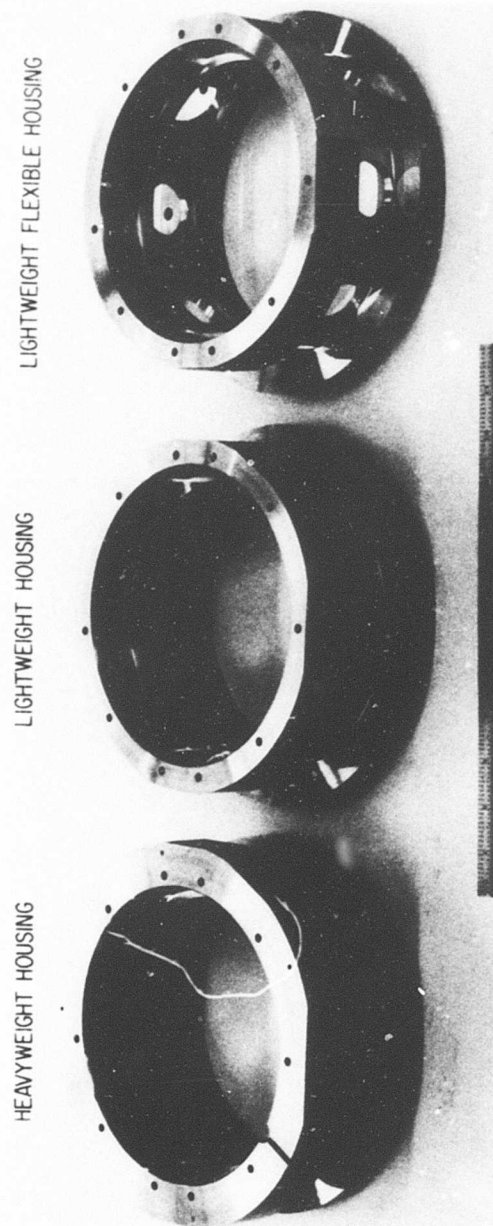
Bearing Housings for Bearings Numbers 4 and 5.
